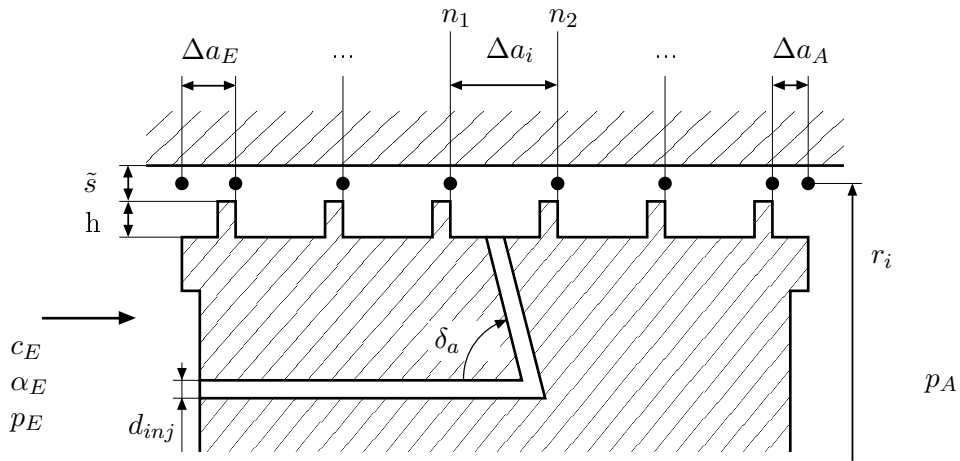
Geometry setup for a shrouded turbine rotor with six fins with passive tip-injection.
